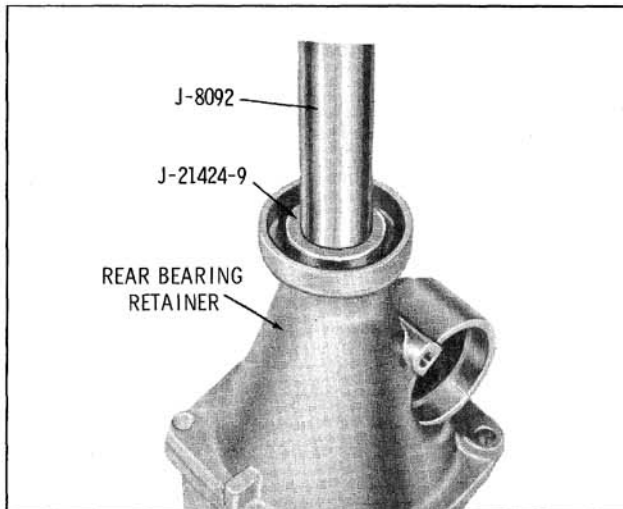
Installing Rear Bearing Retainer Bushing
